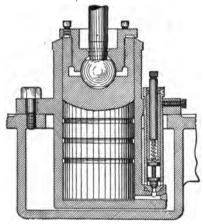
Form of Vacuum Dashpot for Closing Admission Valves
